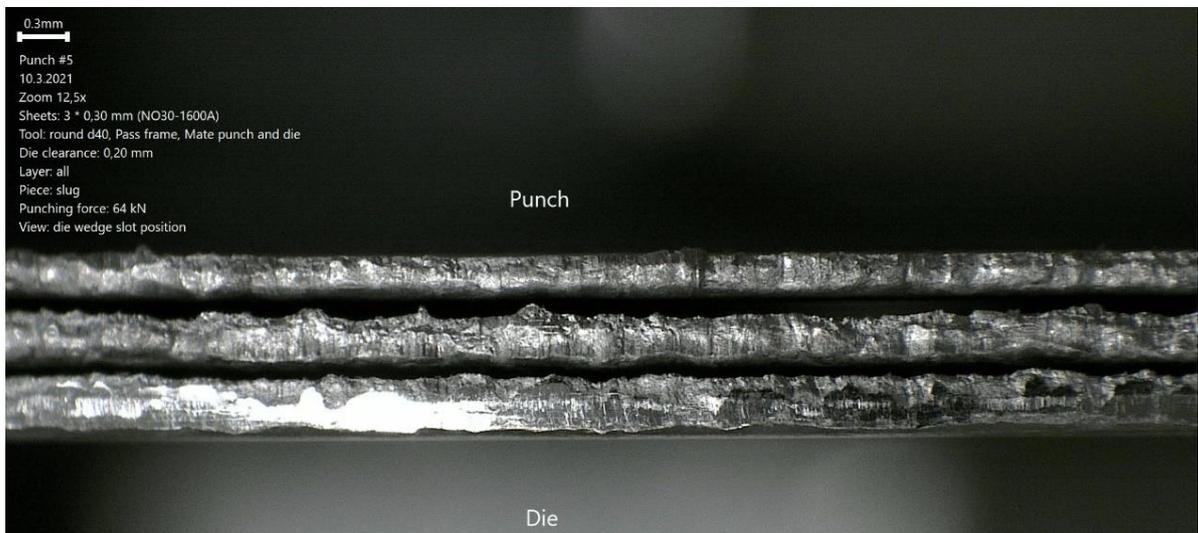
Stack of three NO30-1600A sheets, die clearance of 0.20 mm. Not so clean overall appearance, material starts to transfer between sheets. The penetration zone depth looks worse on the bottom layer than in Figure 33.
